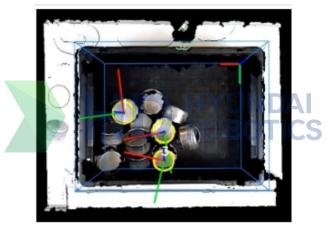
Z-axis direction of the workpiece processed by the Pick-it equipment
